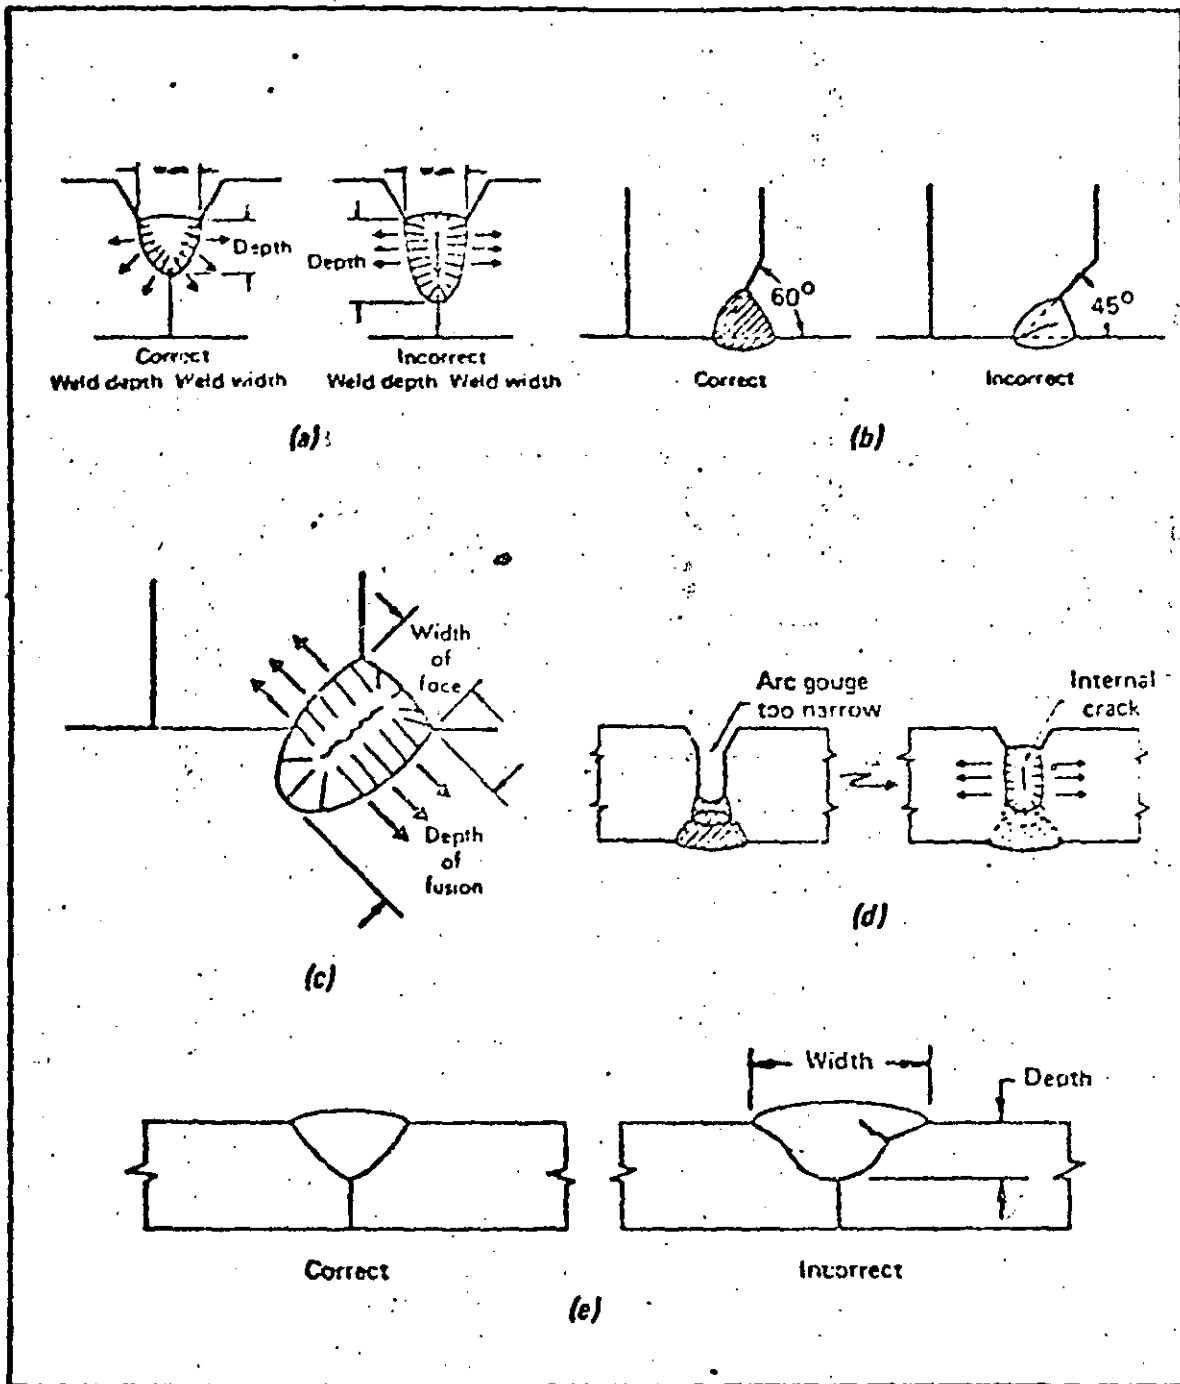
Internal cracking can occur when weld penetration is greater than width. Correct and incorrect proportions are shown in (a), (b), and (c). Arc-gouging a groove too narrow for its depth can cause a similar internal crack (d). Cracks can also occur when depth is too shallow (e). Width of a weld should not exceed twice its depth.
